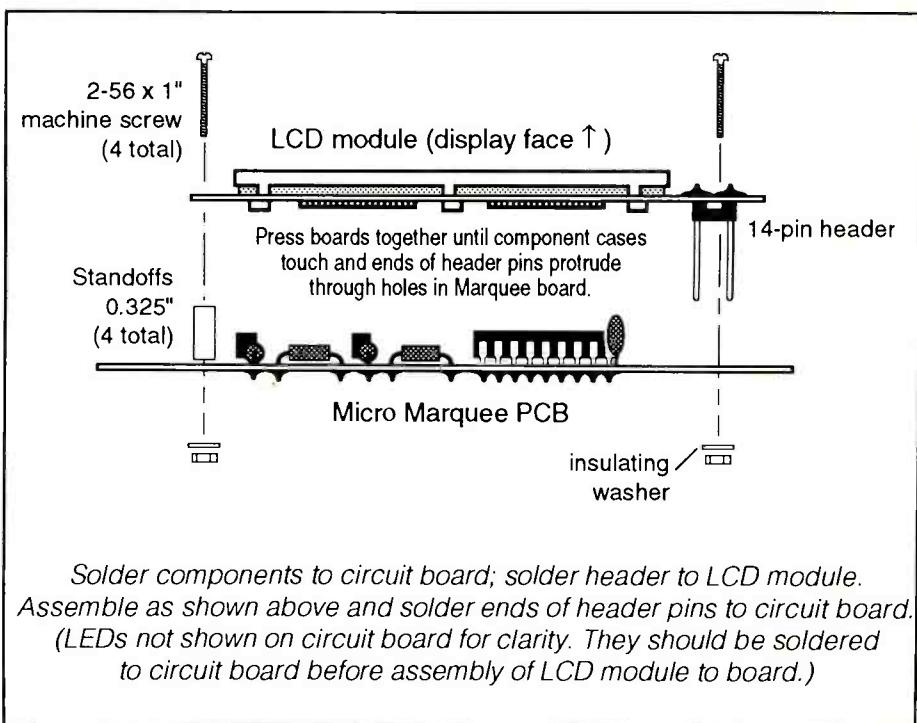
The LCD module is fitted with a male header and plugs into holes in the pc board.
